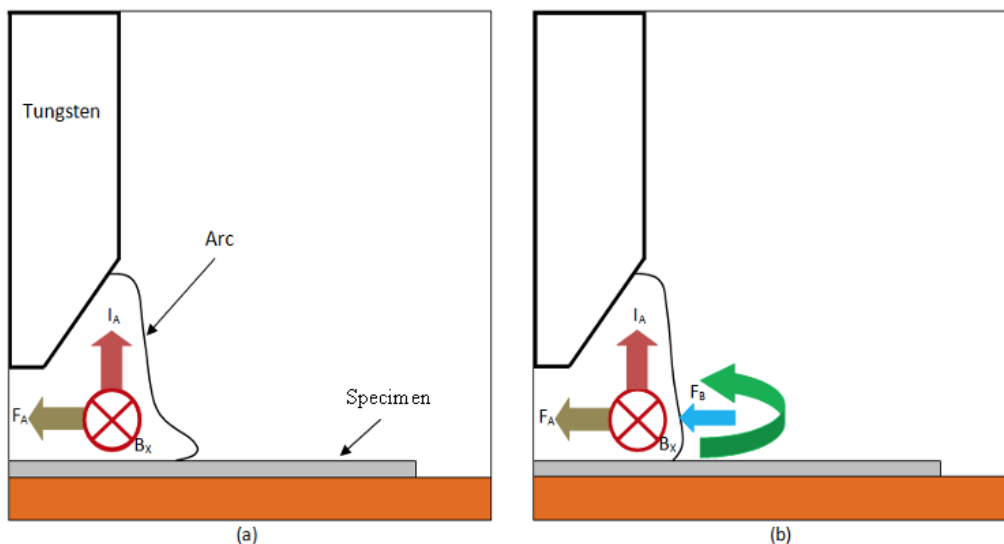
Schematic of arc welding during the welding process: (a). Conventional-TIG and (b). EMF-TIG
